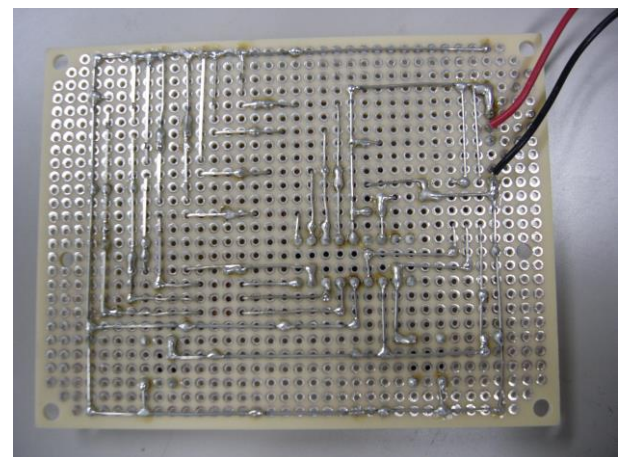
Soldered wiring of the components on the rear of the universal board. This circuit is the same as the one wired on breadboard as shown in Figure 1.
